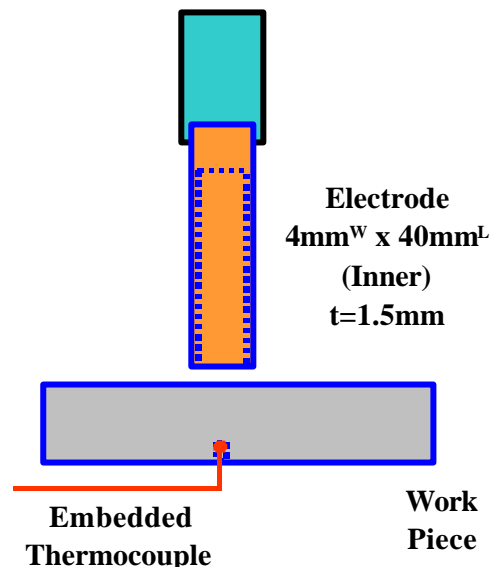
The apparatus of embedded thermocouple in cutting specimen
